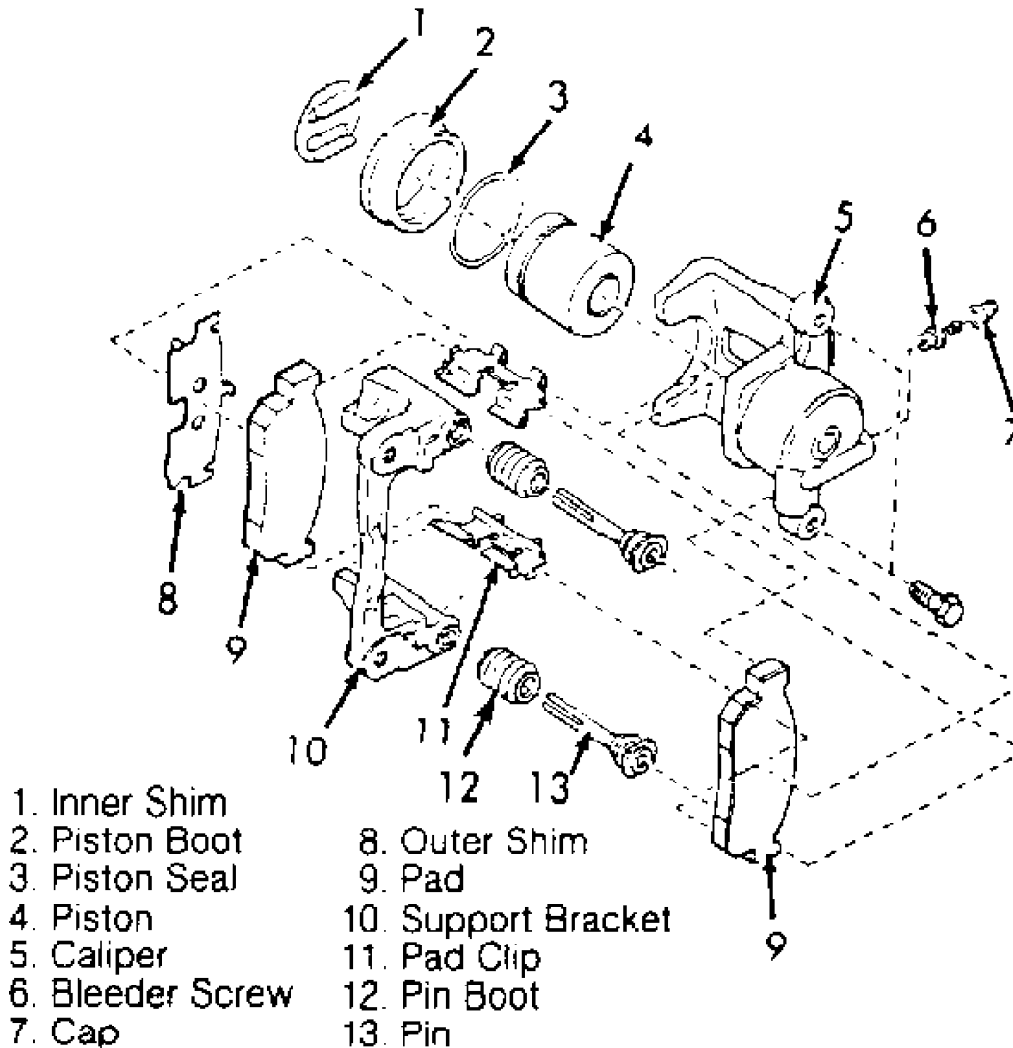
Front Caliper Component ID (Justy; Legacy Non-Turbo Similar)
